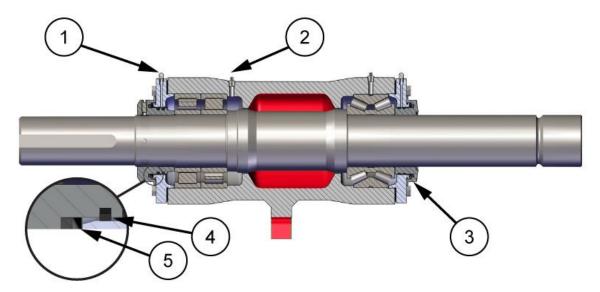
Fitting Labyrinths, V-Rings, Piston Rings on Heavy Duty Bearing Assemblies.
